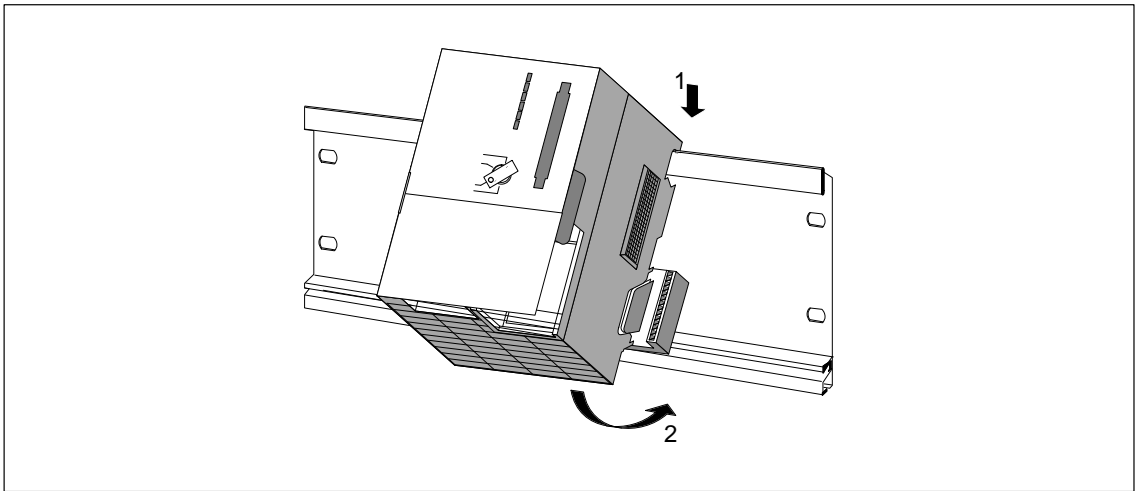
Fitting the FM 356 onto the DIN Rail and Swinging into Place
